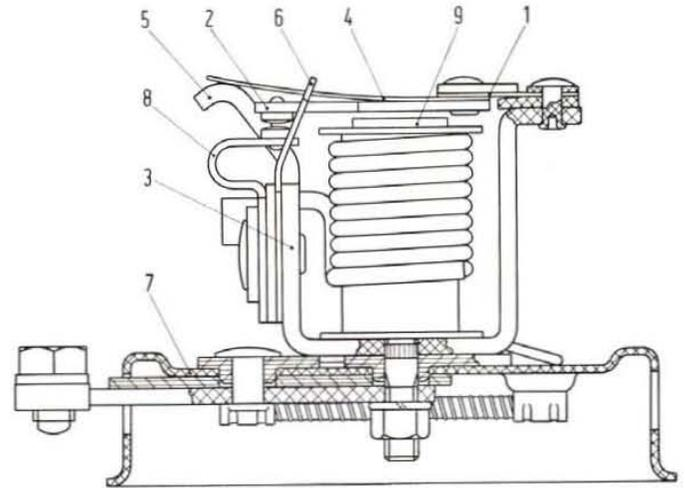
Cutout relay for regulator assembly GN 2/12/16.
